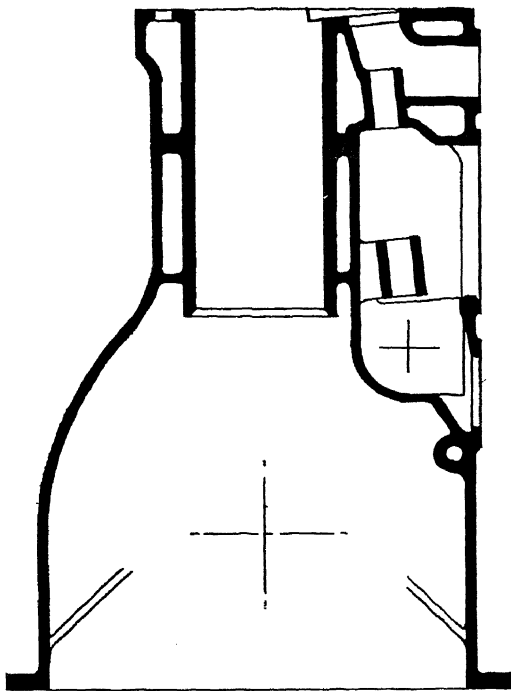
COMBINED CYLINDER BLOCK AND CRANKCASE CONSTRUCTION
